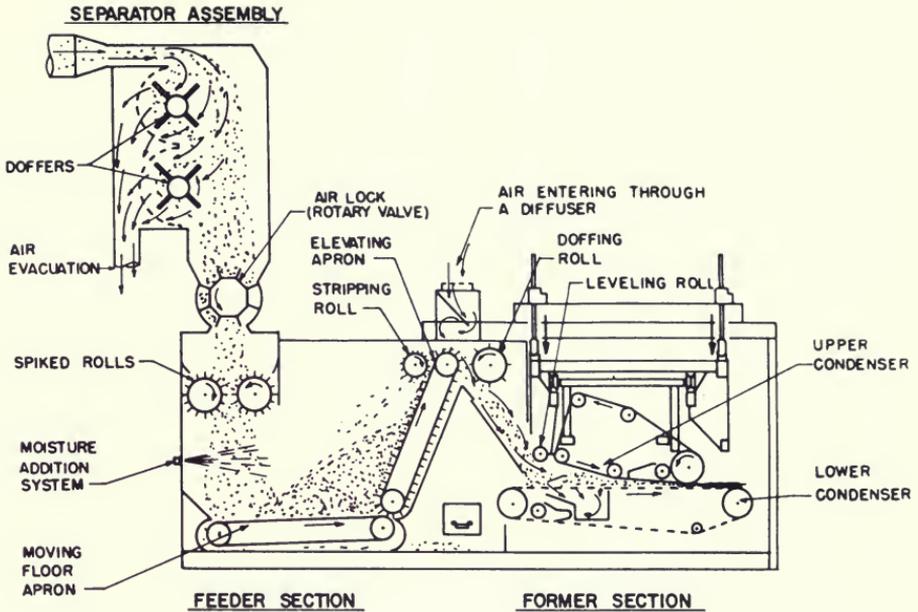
Rando-Wood former. (Drawing after Wood 1976.)
